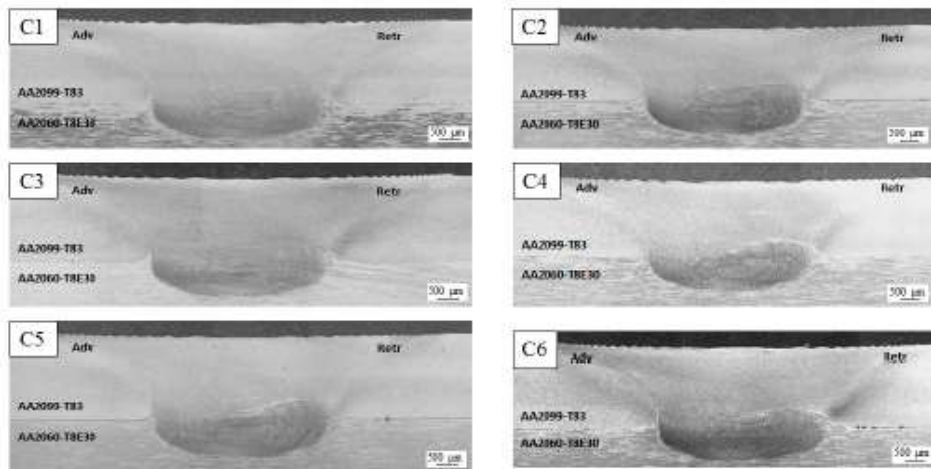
Cross-sectional macrographs of the FSW welds for C1–C6 coupons.
